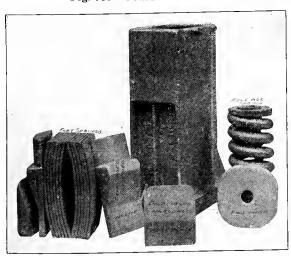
Parts of Gould Friction Draft Gear for Freight Cars.
